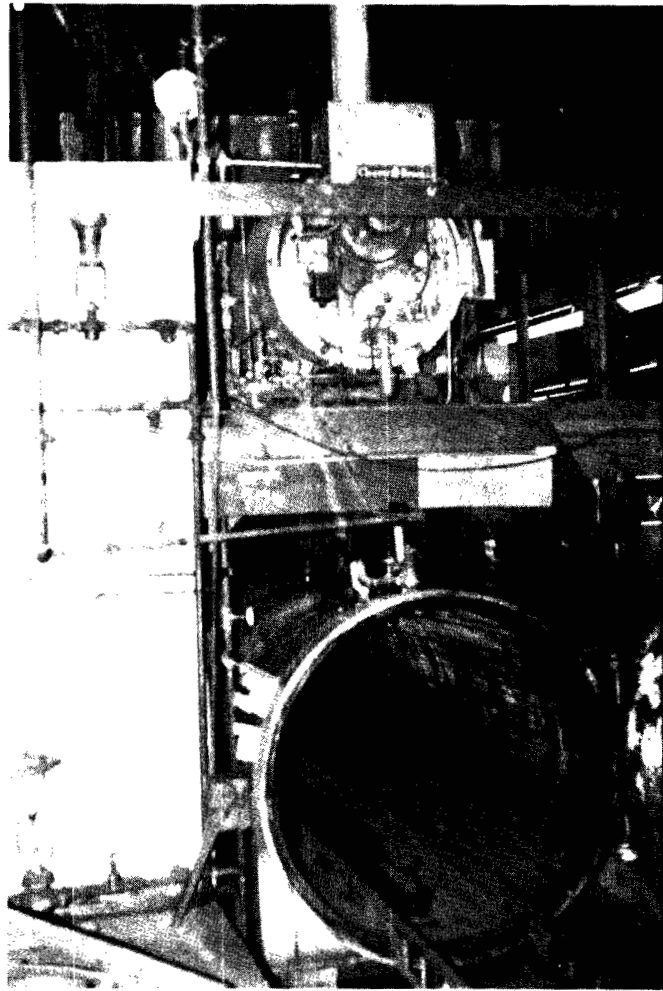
STEAM AUTOCLAVE FOR RUBBER PARTS
